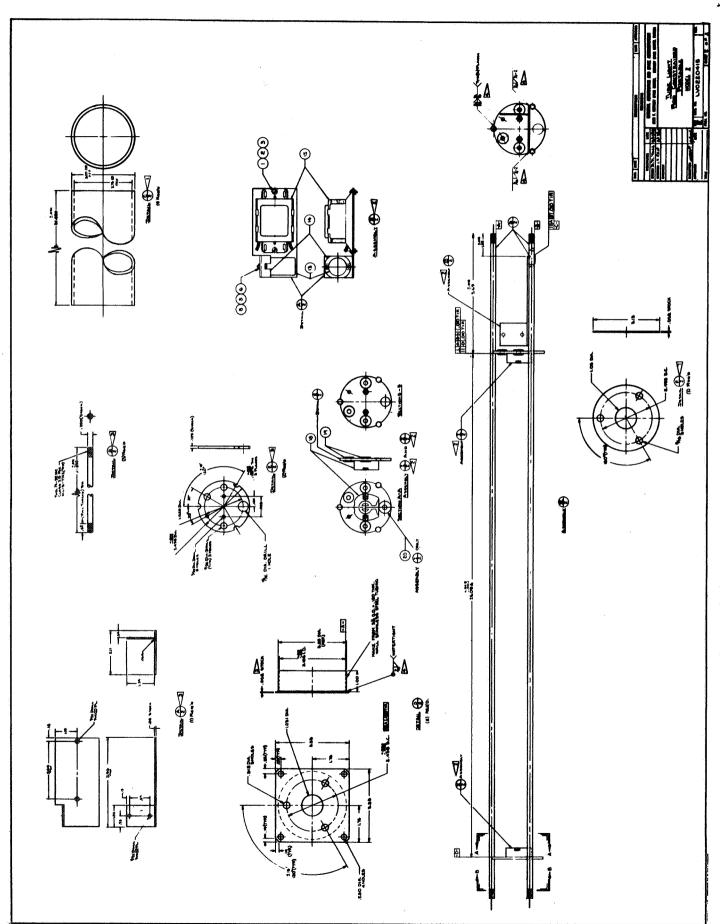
Tube Light Assembly (Sheet 2 of 2)
